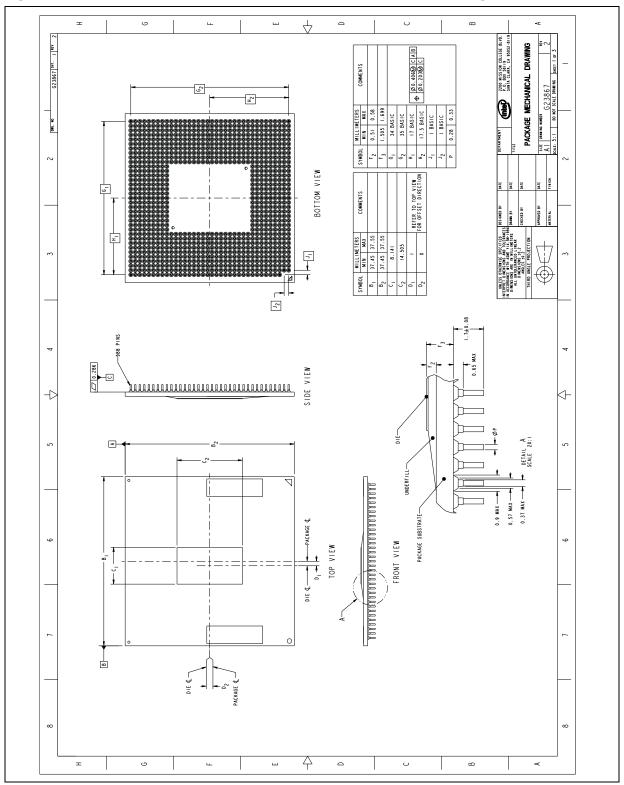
Processor rPGA988B 2C/GT2 (G23867) Mechanical Package (Sheet 2 of 2)
